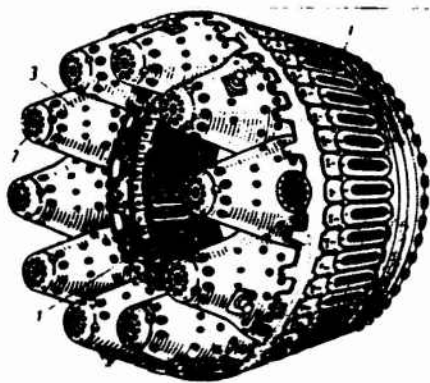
Exterior view of a flame tube of an annular combustion chamber.
